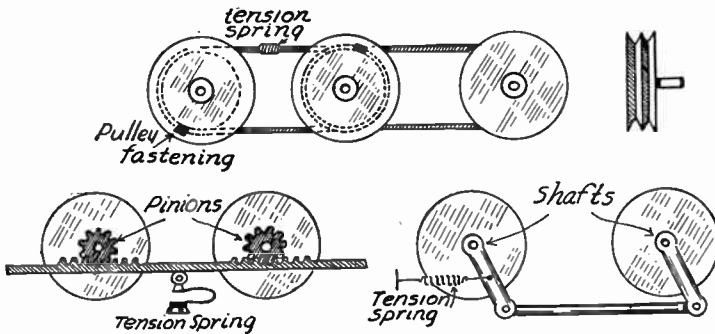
Single Control for Side-by-Side Tuning Units.
